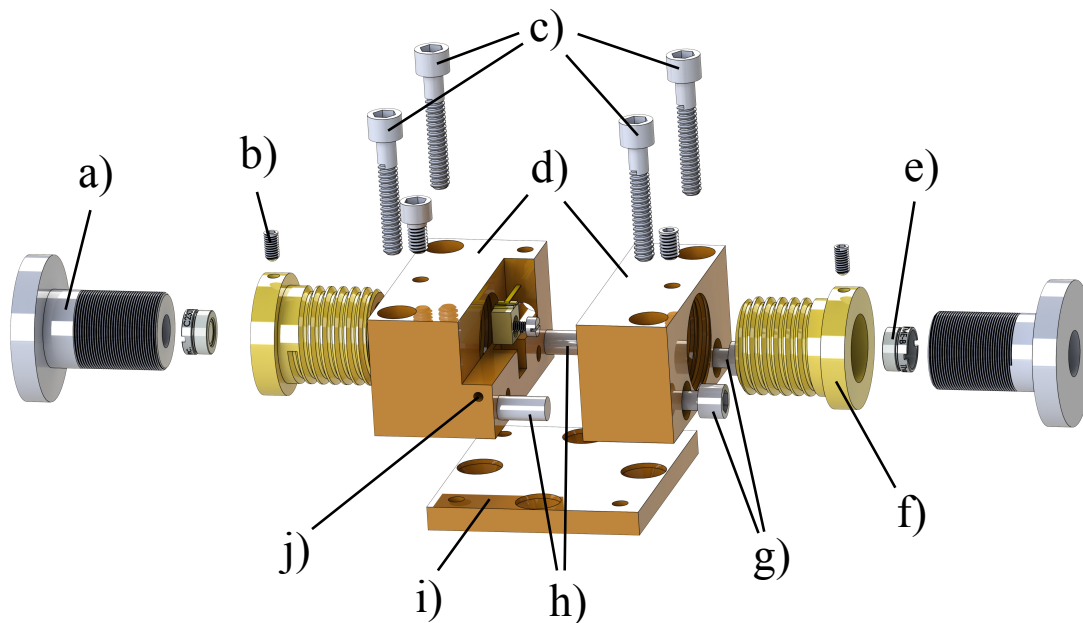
Copper mount with lens holder assemblies. a) inner lens holder tube, b) set screws for inner lens holder tube, c) M4 screws for connecting copper parts with baseplate, d) copper parts, the left one is in detail shown in fig. 4.1, e) aspheric lens, f) outer lens holder tube, g) M4 screws to connect the two copper parts, h) centering rods, i) copper baseplate, j) hole to place a thermistor.
